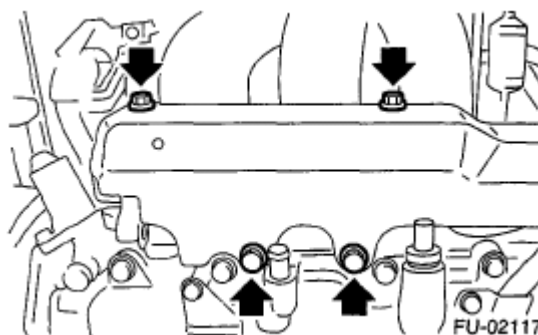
Locating Fuel Pipe Protector Bolts (RH)
